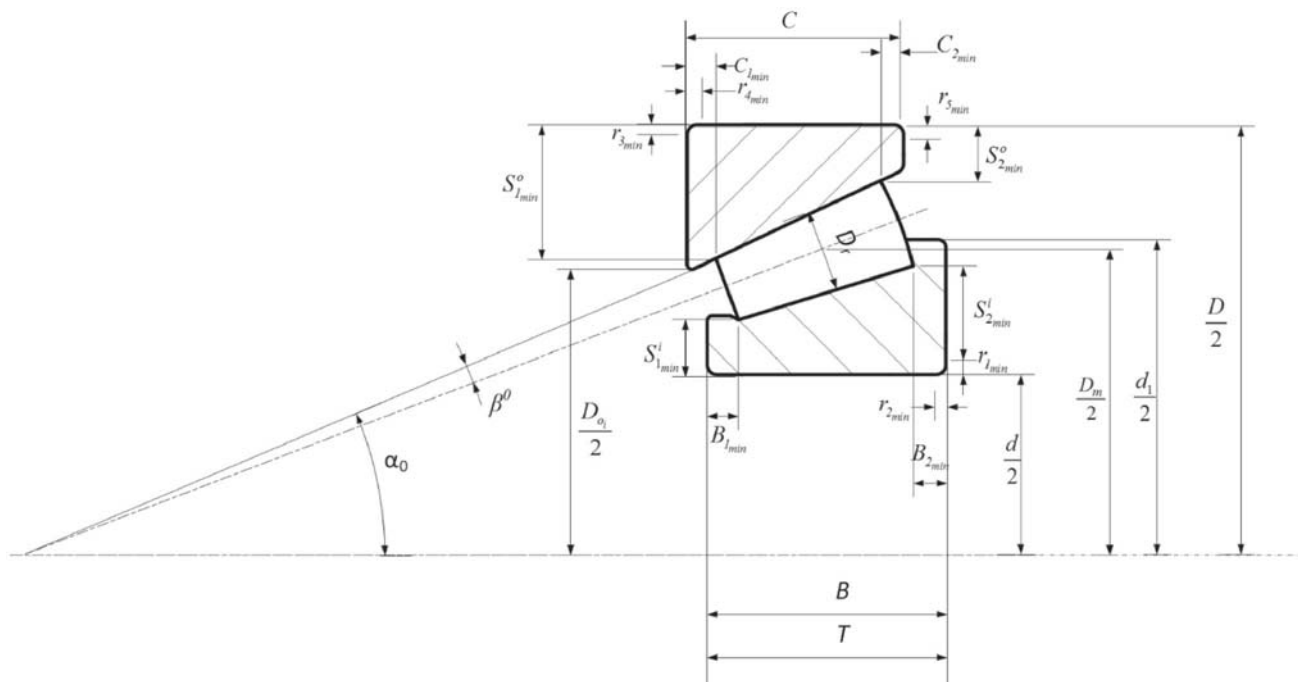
A sectional view of a tapered roller bearing with the cup, cone and roller.
